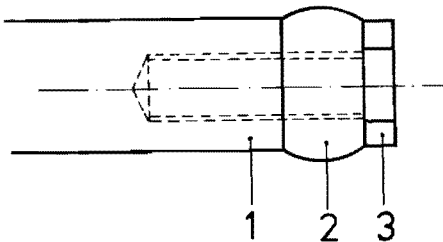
Welding tip for welding directly to an aluminium anvil. 1. End of the amplitude transformer. 2. Hard Al ring; radius of the outer spherical surface is 12 mm. 3. Bolt to fasten the ring to the amplitude transformer.
